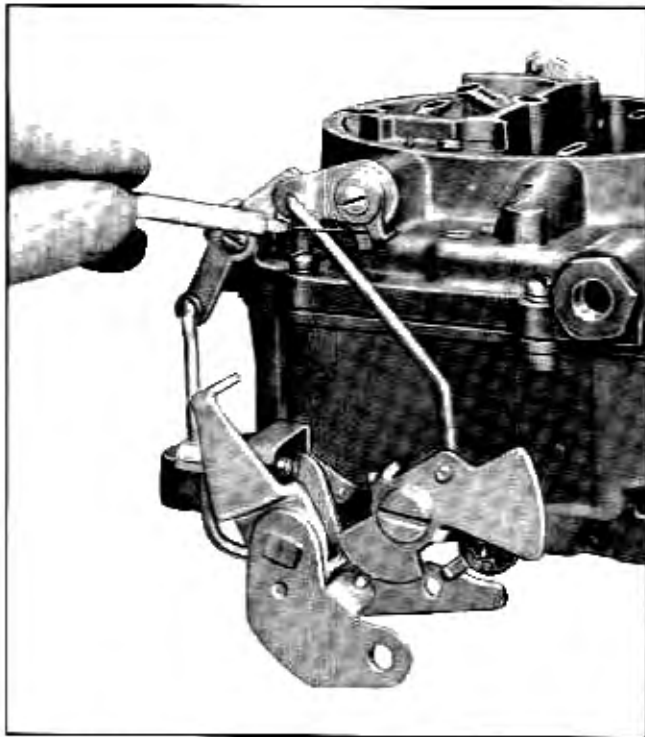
B-96 Checking Choke Shaft Lever Adjustment
